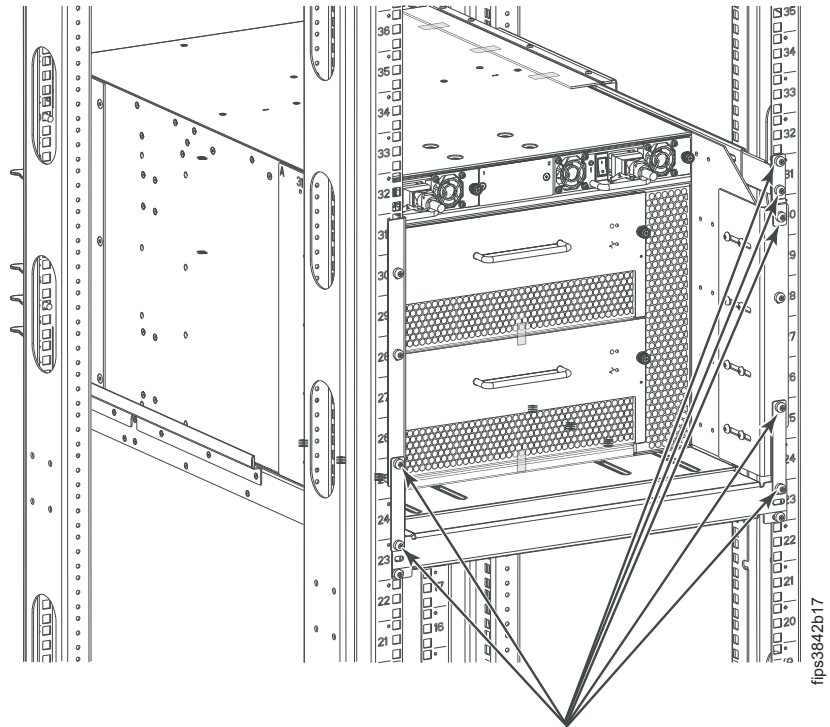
Three 2499-416 rackmount FIPS brackets installed on non-port side
